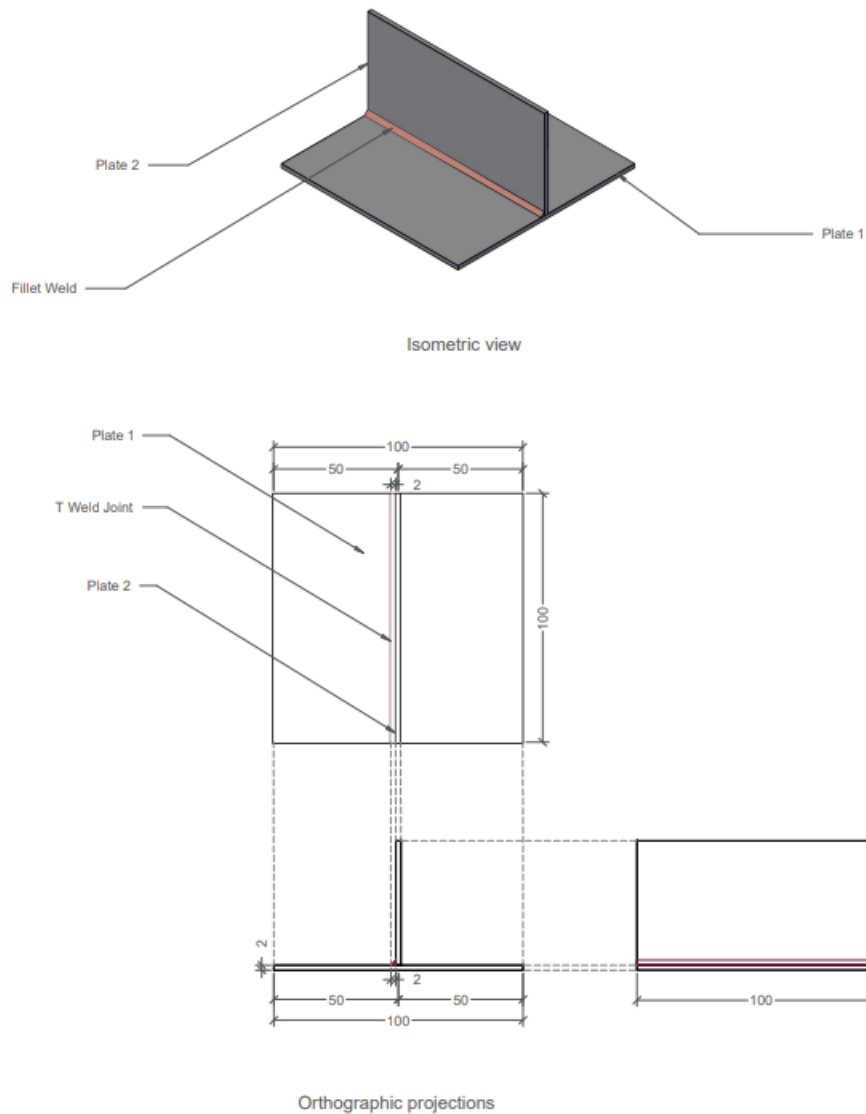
; T weld Geometry and Configuration (Source - Author)
